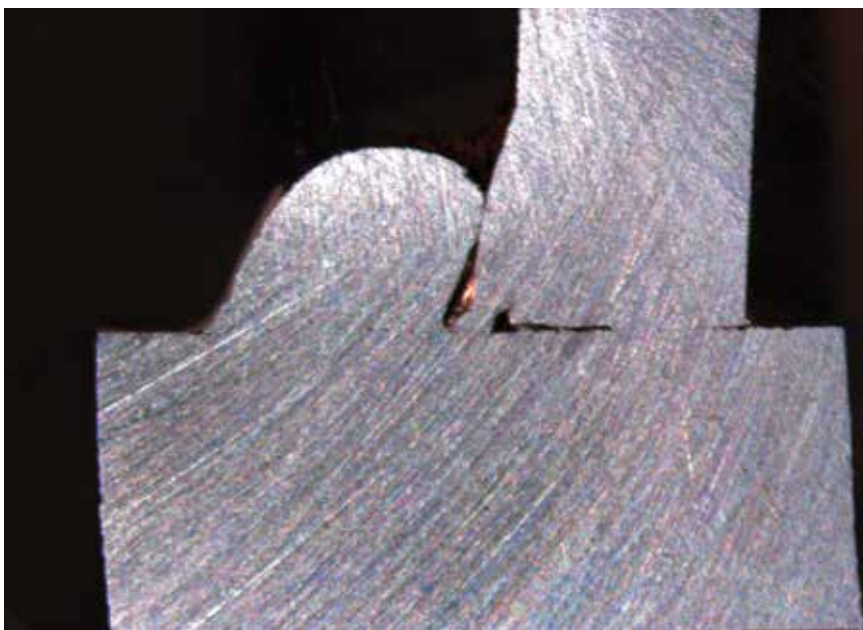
When a transverse section was prepared from a sample, inadequate fusion was revealed between the tube wall and the weld bead and between the endplate and tube.
